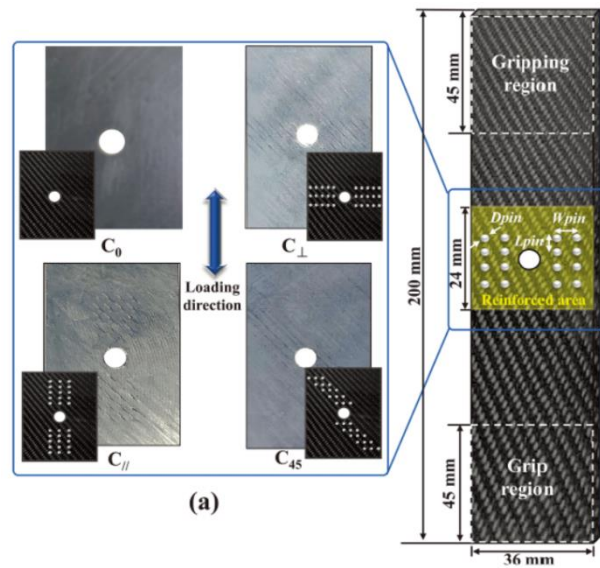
Dimension of Z pinned open hole tensile (OHT) specimens prior to damage [10]
